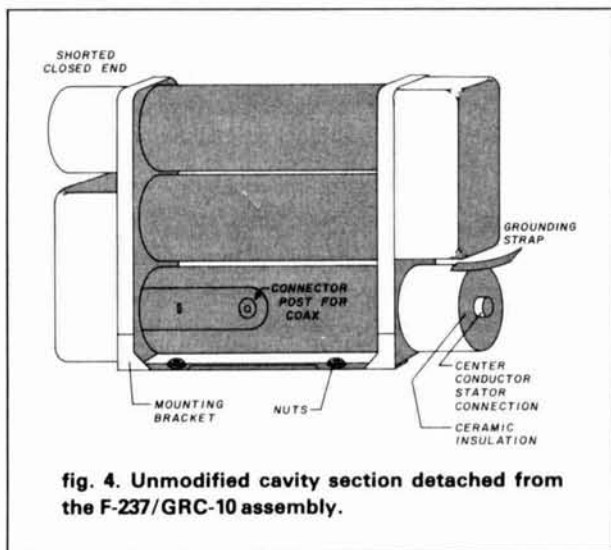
Unmodified cavity section detached from the F-237/GRC-10 assembly.
